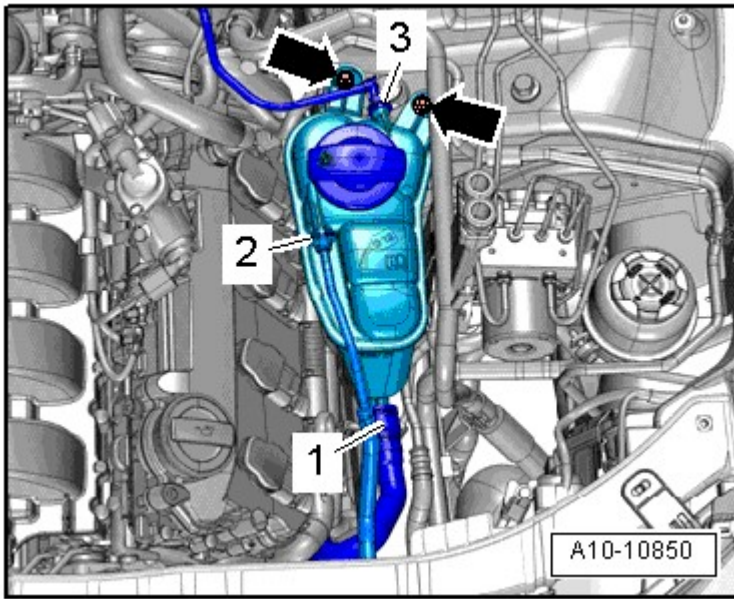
Identifying Coolant Hose And Coolant Reservoir
